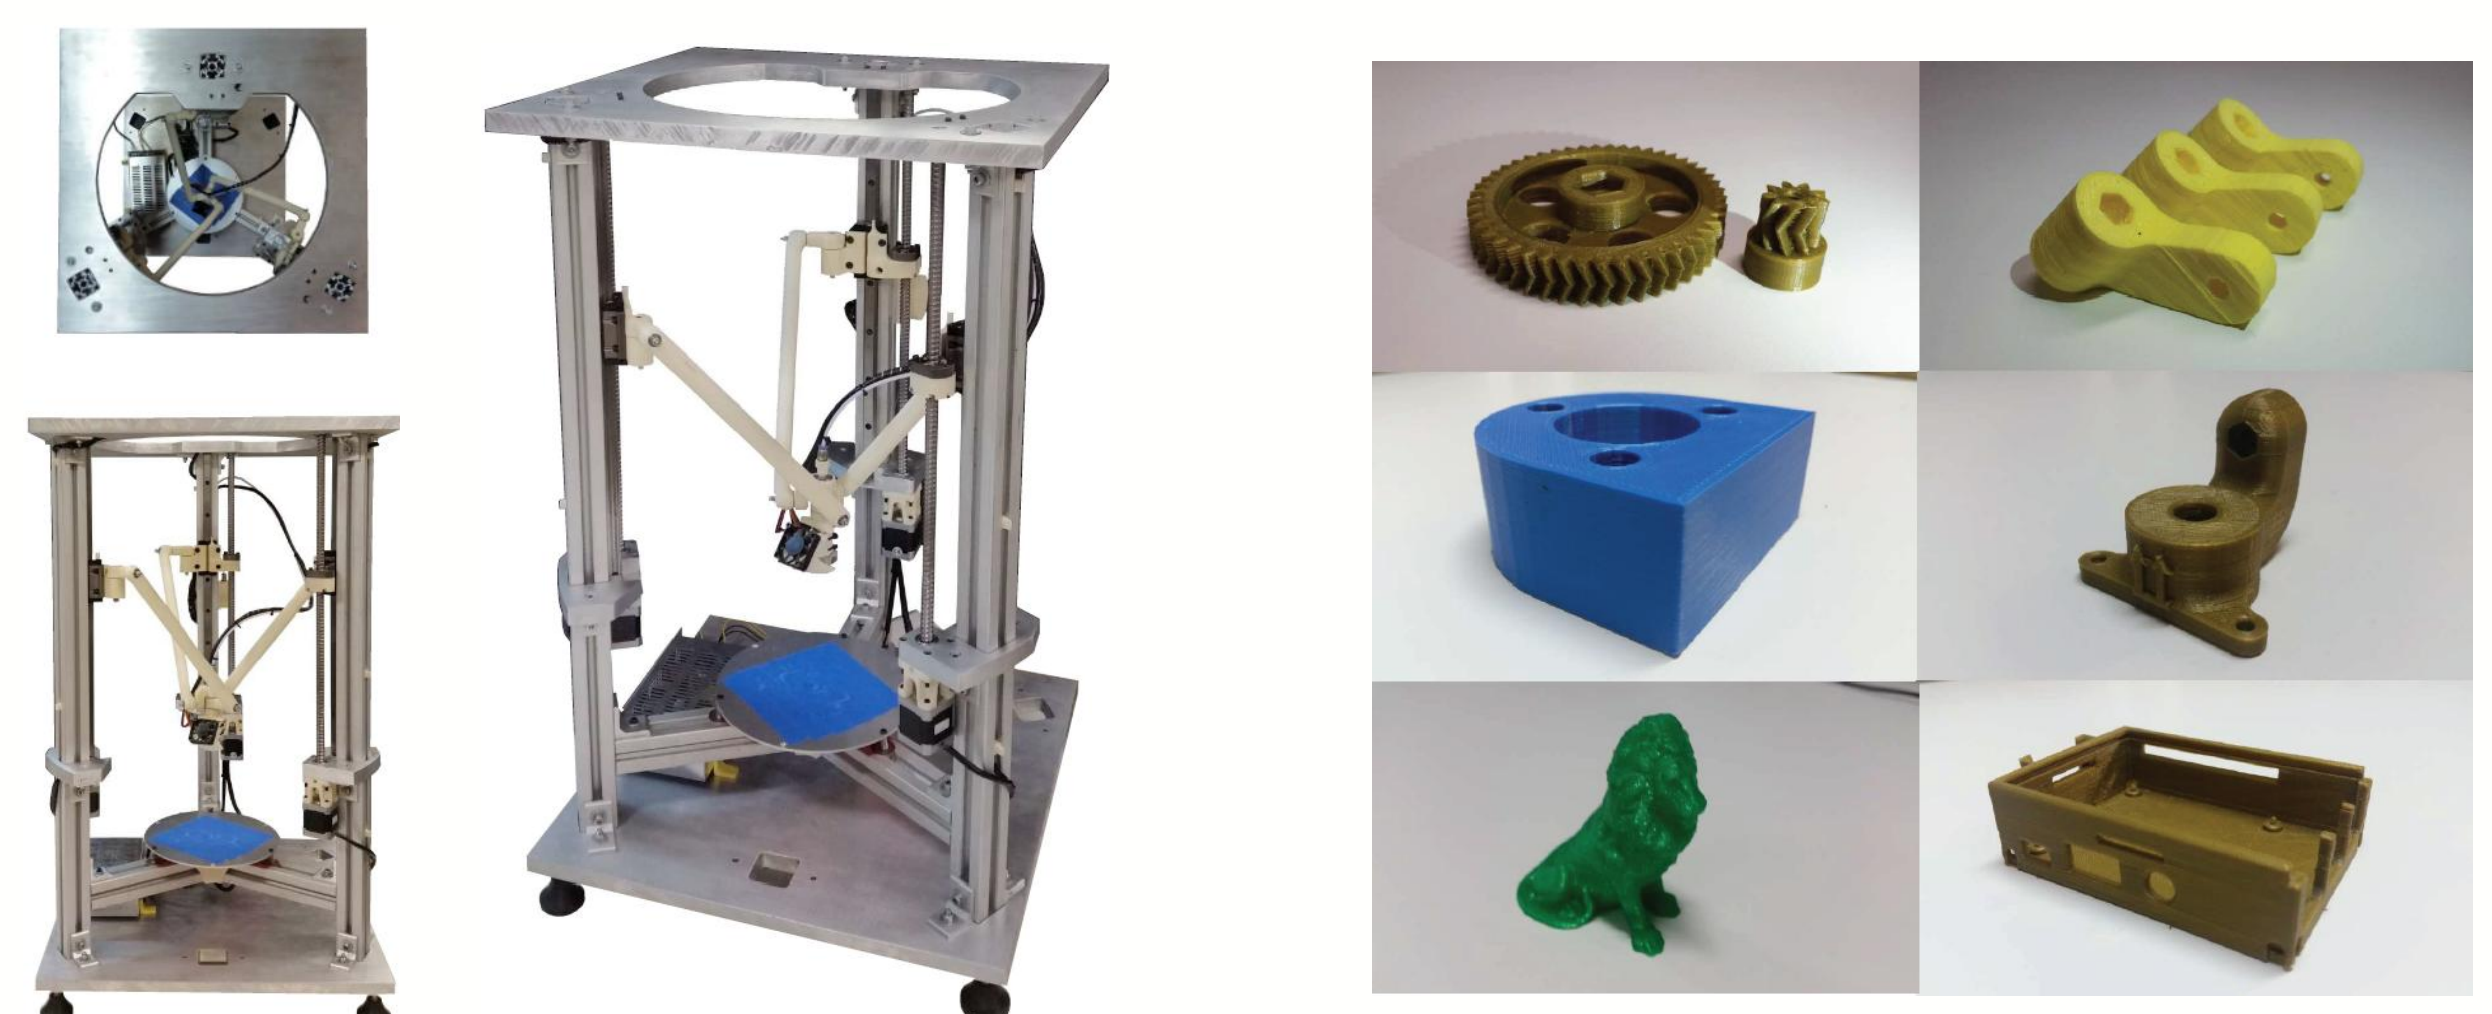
Prototype of the Linear Delta robot for AM and some printed parts.
